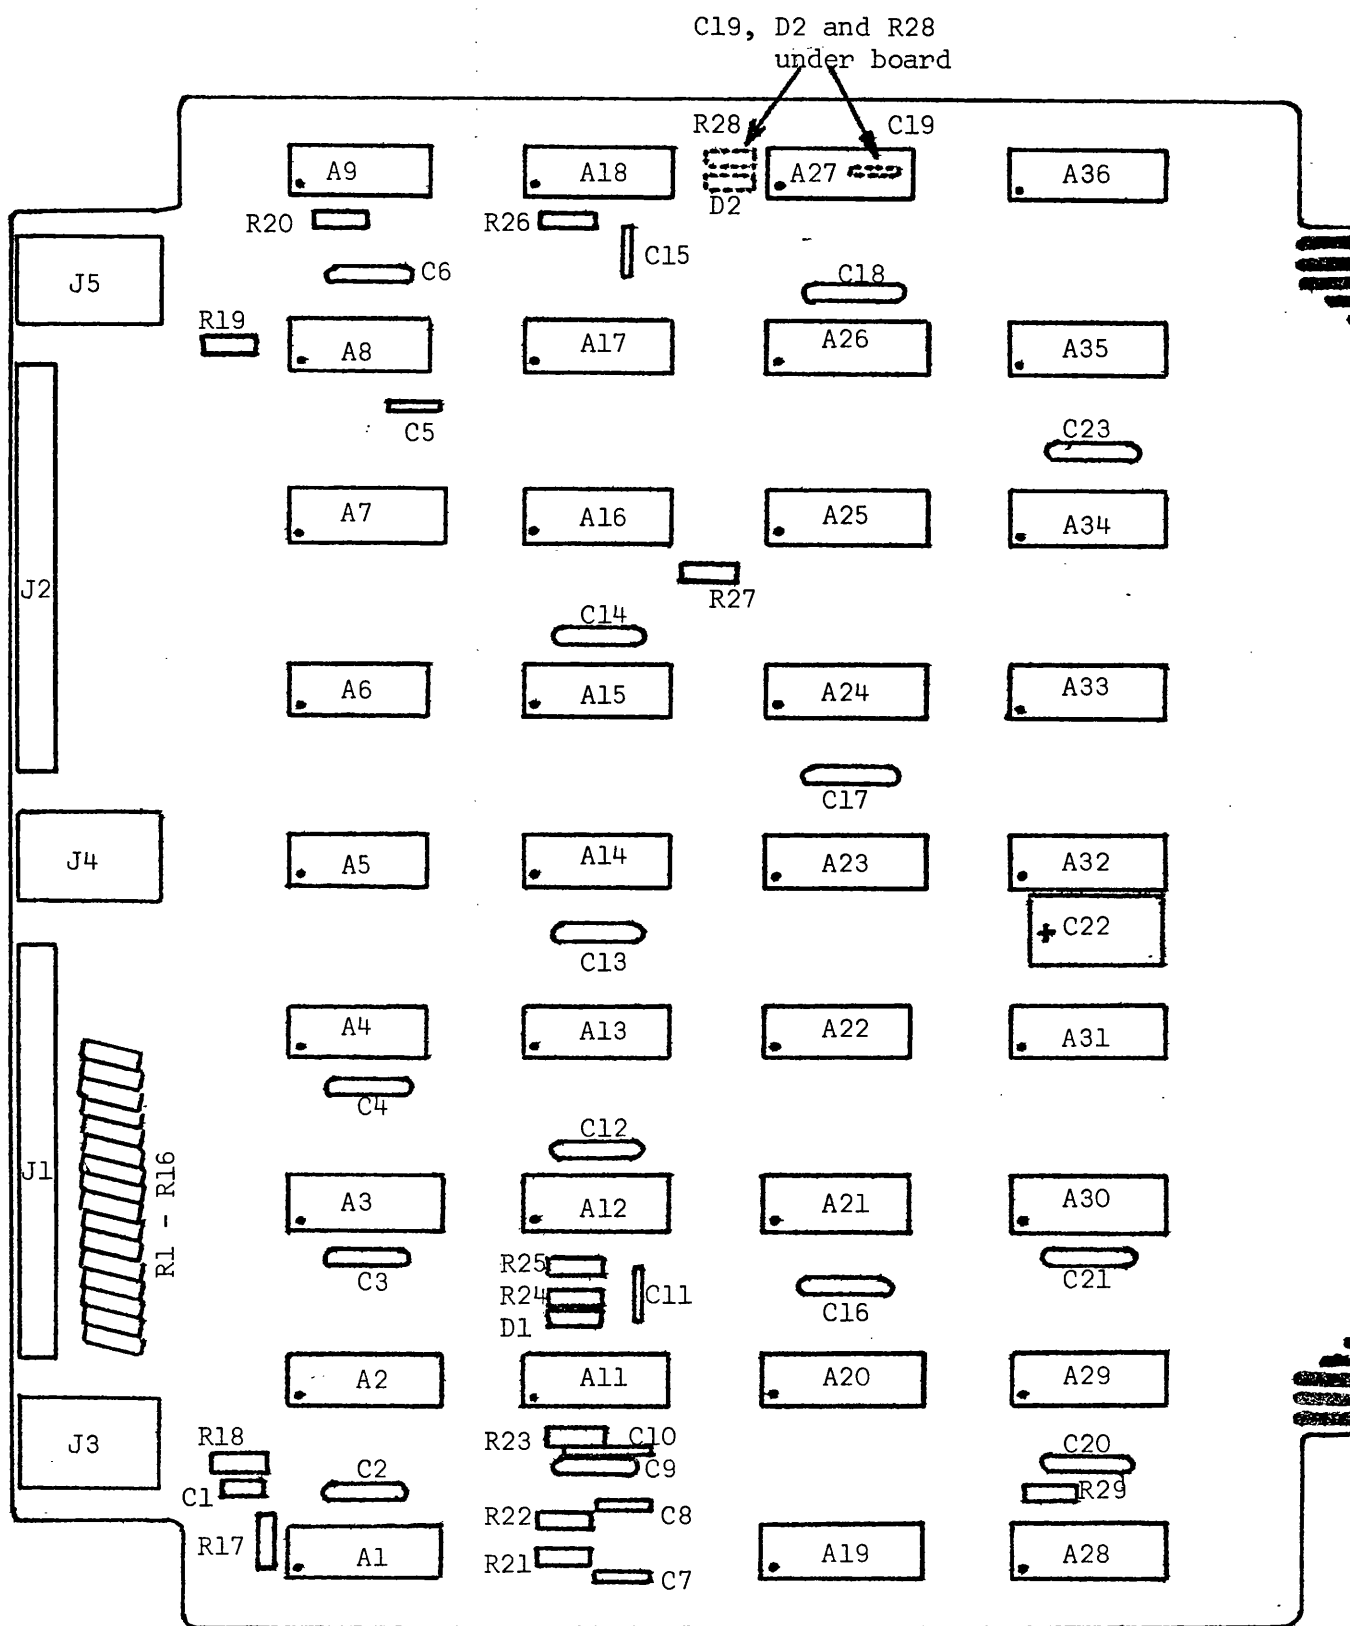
PDP-11/20 to I8080 Interface Card Component Layout
